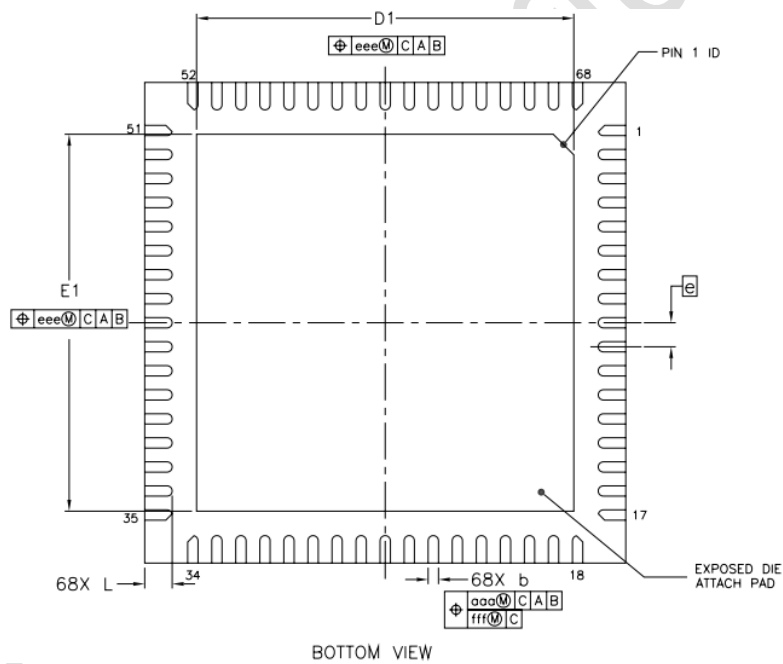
RKNanoD-NQFN68 Package Bottom View
